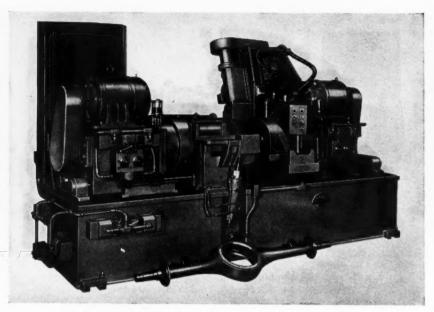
Snyder Special Automatic Machine for Drilling Truck Rear-axle Housings
